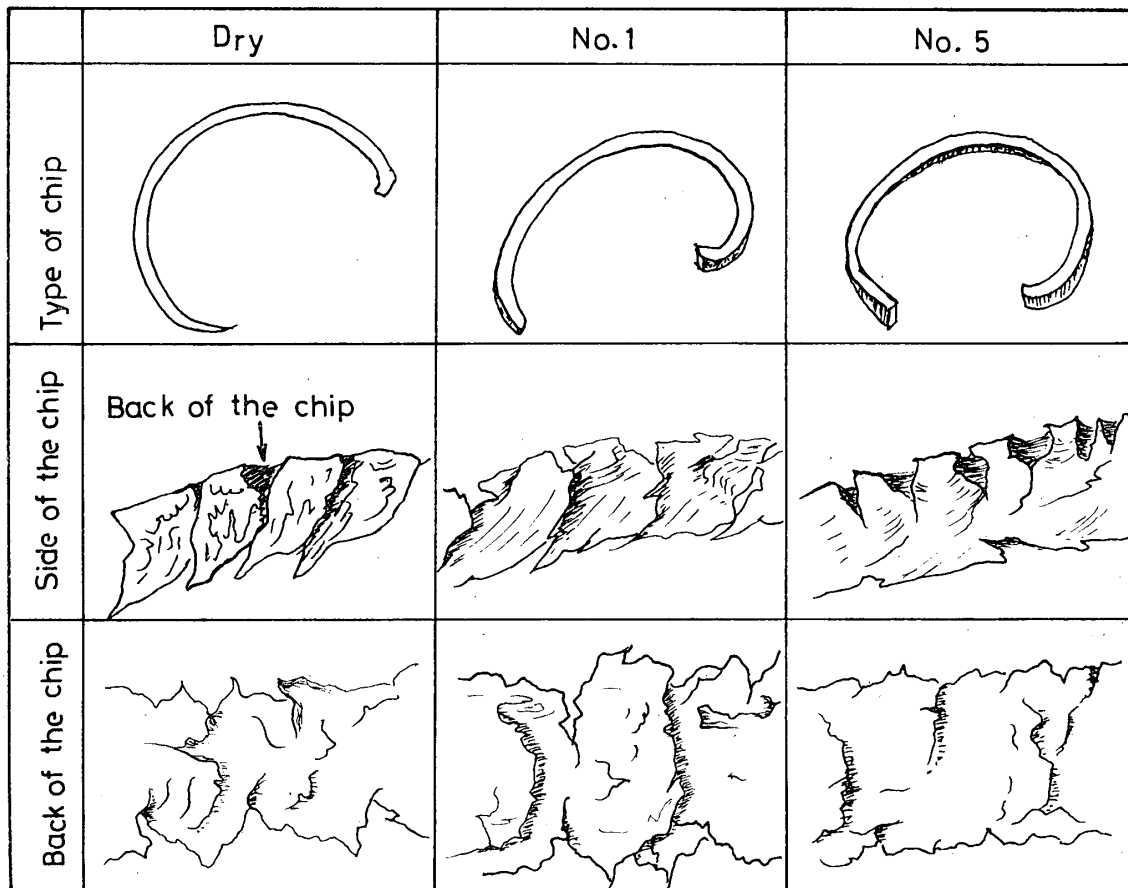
(b) Sketches of chips. Workpiece SCM 4, back rake angle $\alpha=25^\circ$, depth of cut $t_1=0.8\text{mm}$
